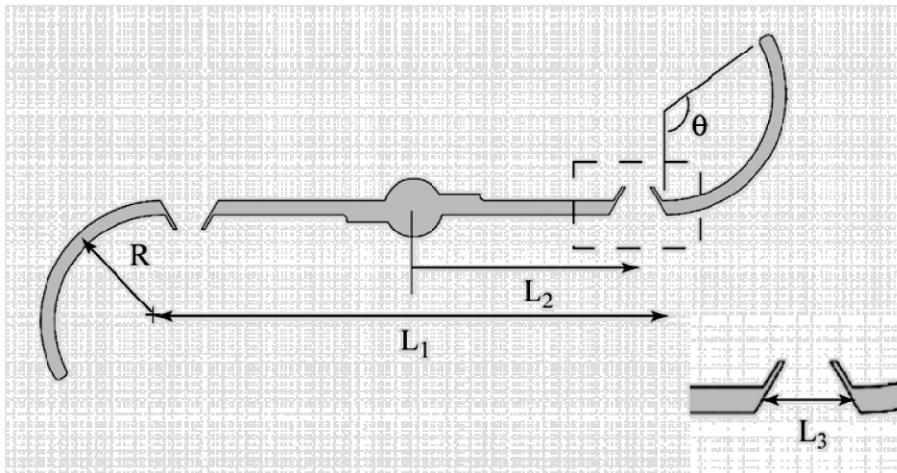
Cross section of turbine rotor with dimensional nomenclature (from [12]).
